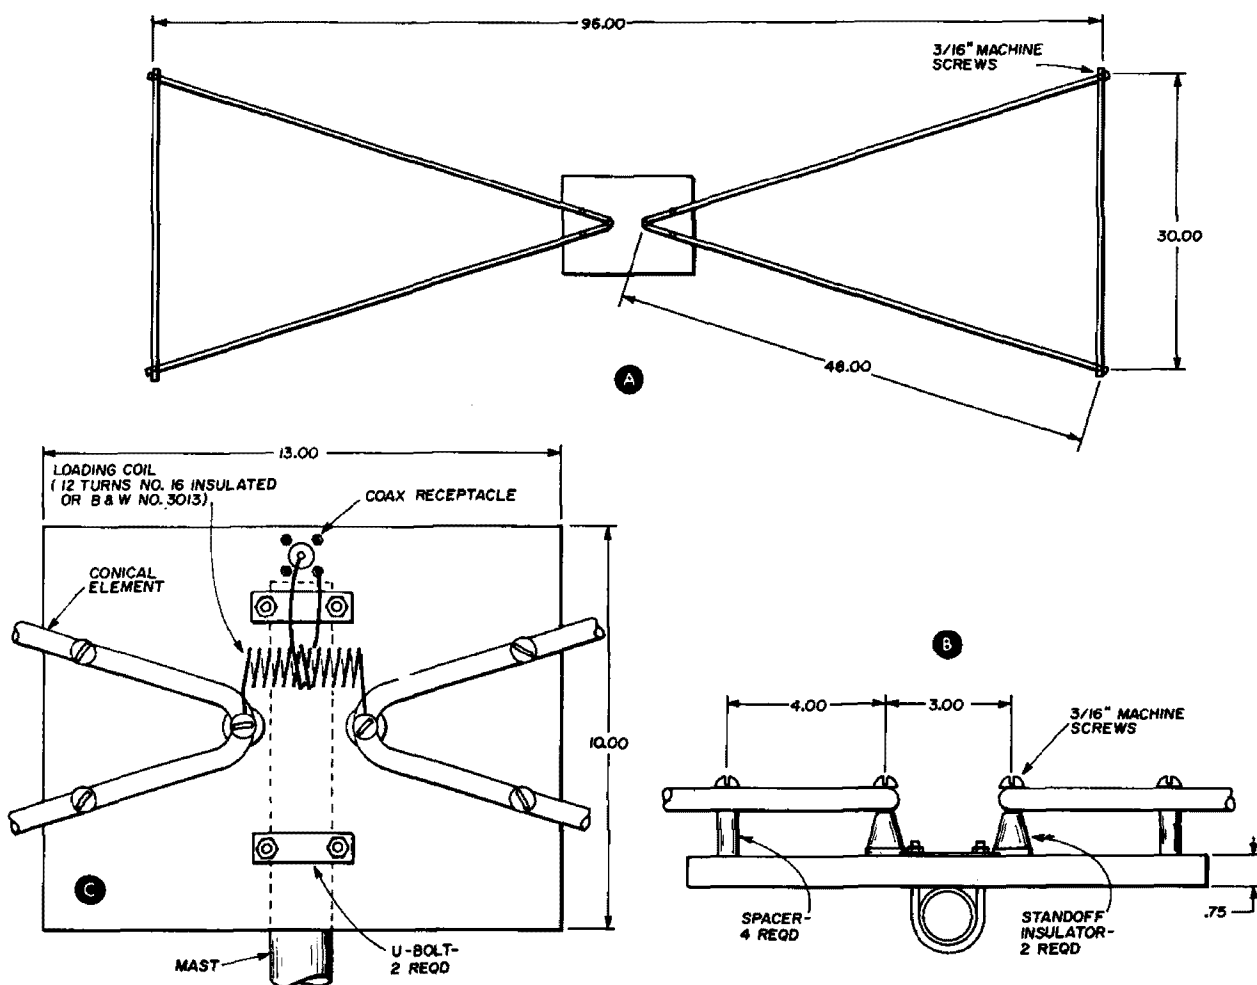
Dimensions, A, and mounting details, B, of the Wonderbar beam driven element. Mounting base is a simple pine board.
